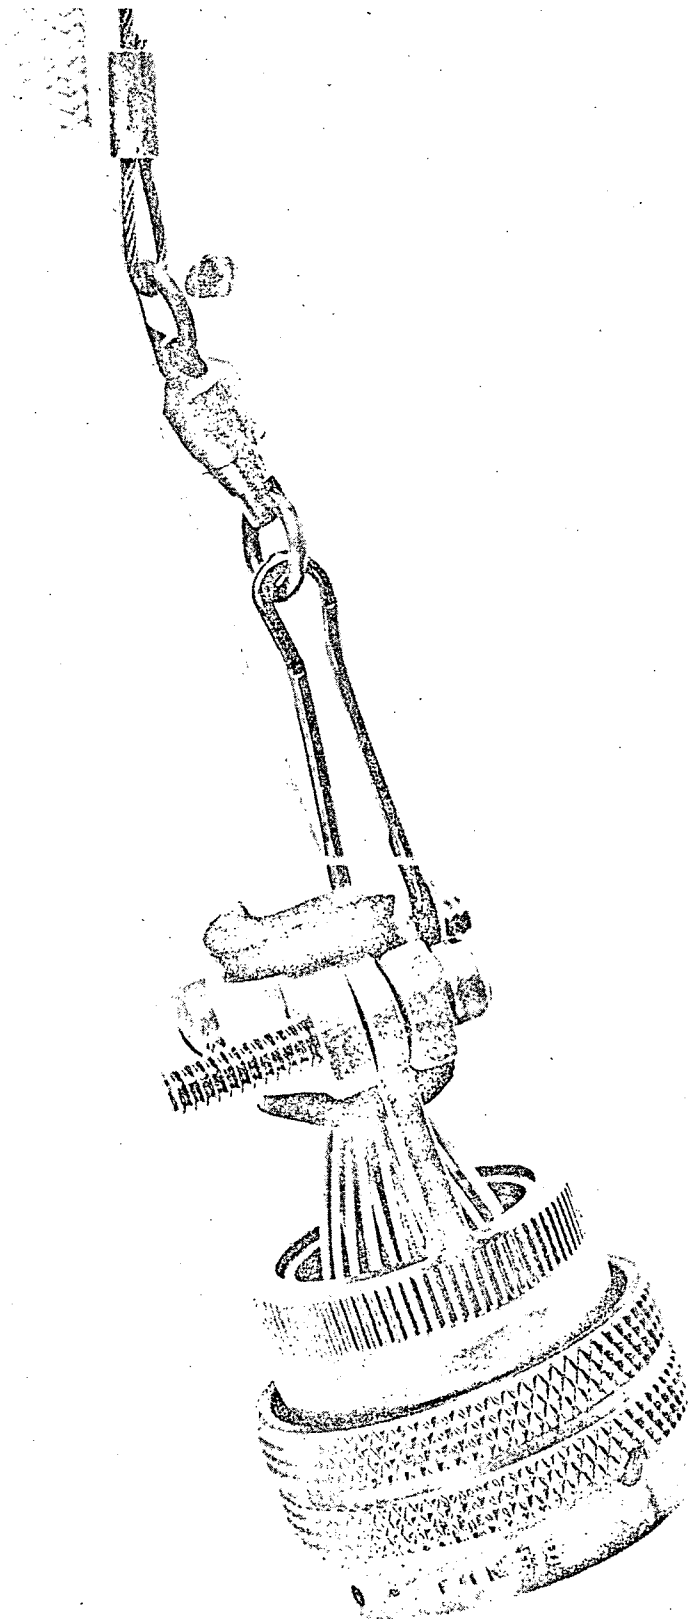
CONNECTOR BACKSHELL, TENSILE MEMBER WITH SWIVEL HOOK, AND CONVENTIONAL BUNDLE CLAMP
